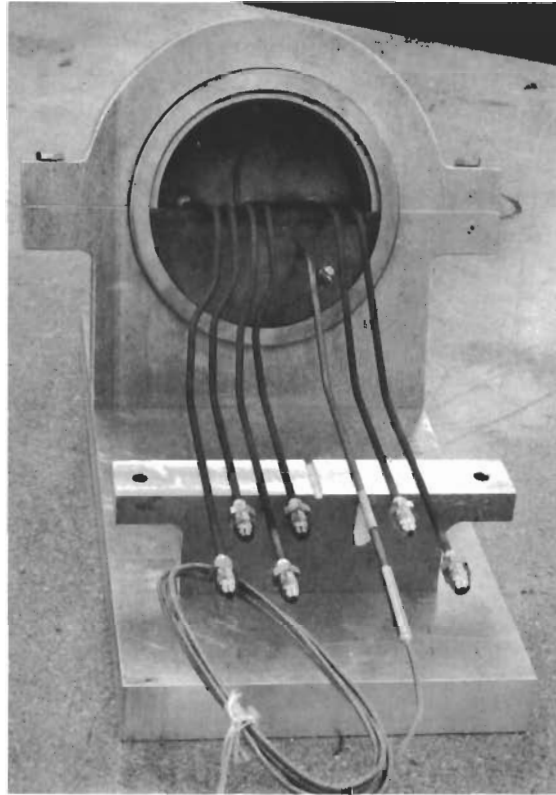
CAP MOUNTED IN TOOLING FIXTURE SHOWING ASSEMBLY OF INSTRUMENTATION, HALF OF MOLYBDENUM BASE PLATE, AND HALF OF GRAPHITE INSERT
